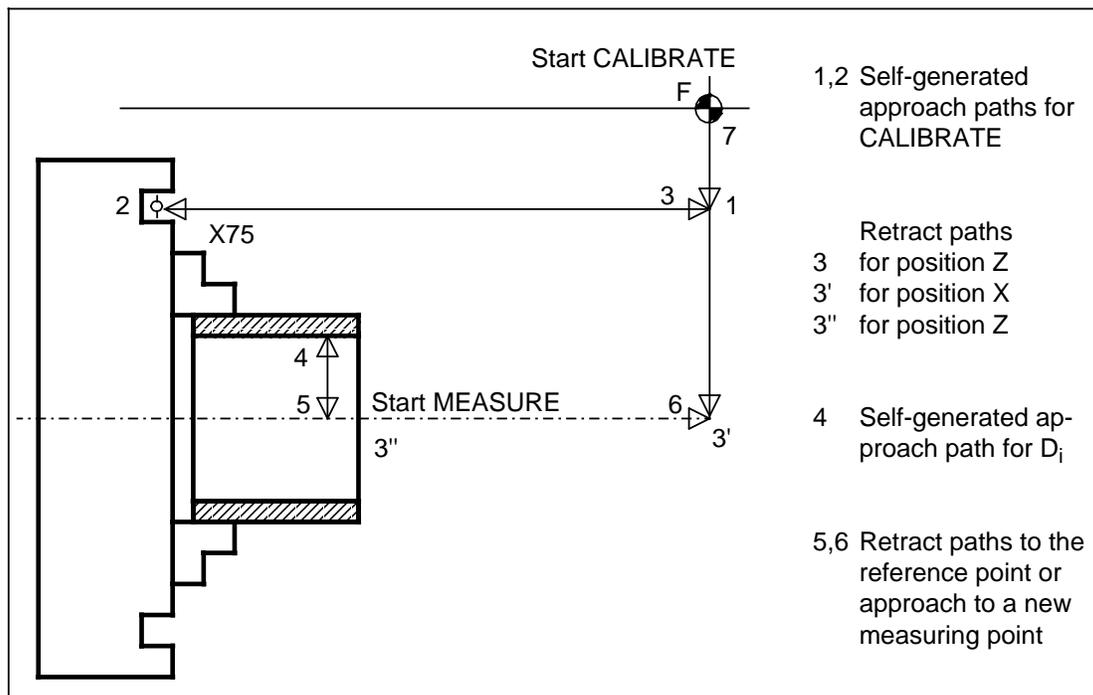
1-point measurement on inside diameter with CALIBRATE
